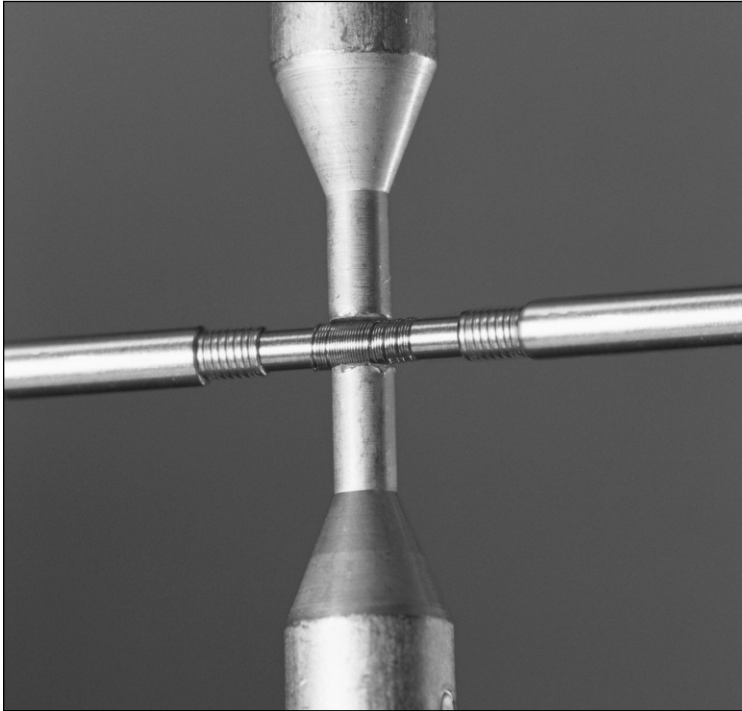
Stainless steel coil to stainless steel tube using Constant Voltage mode. HF25 Power Supply, Series 300 Weld Head.
